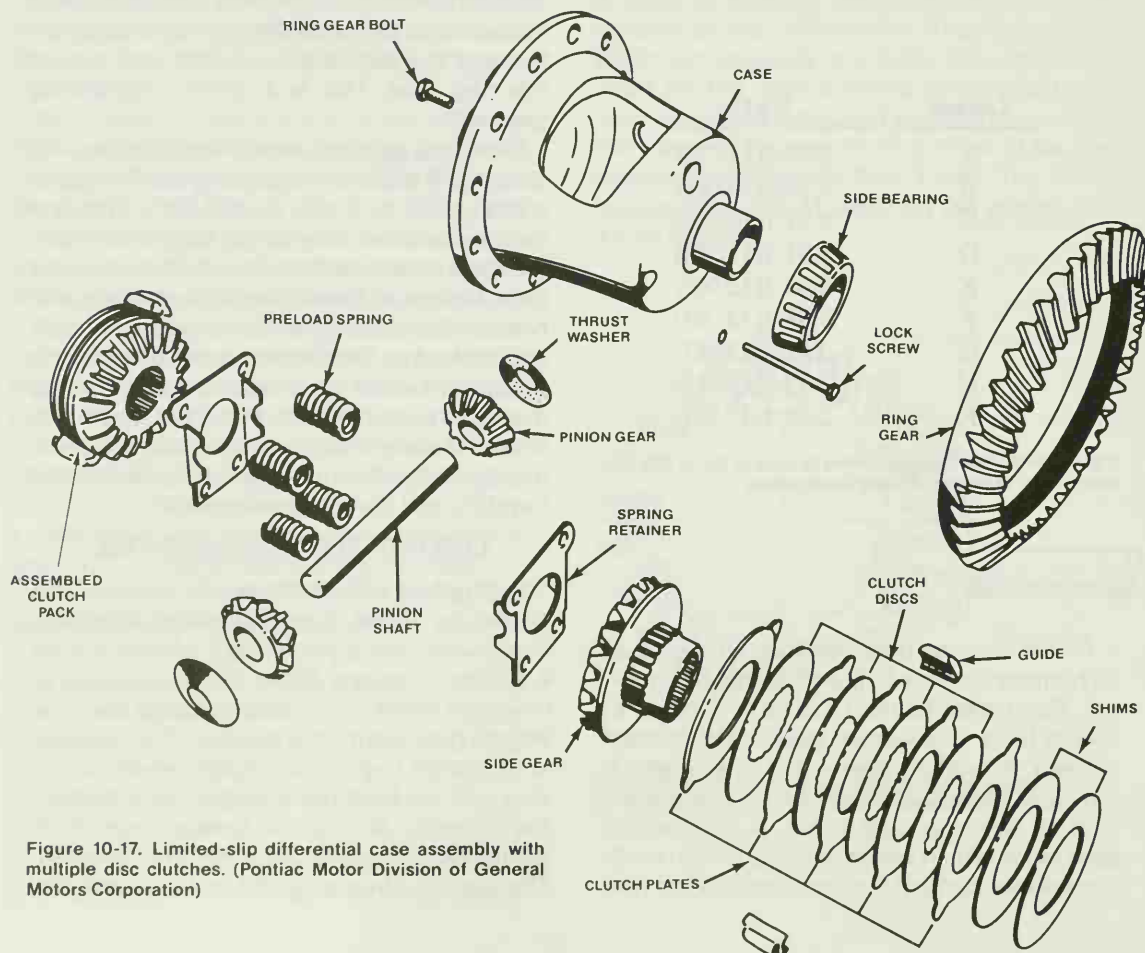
Limited-slip differential case assembly with multiple disc clutches. (Pontiac Motor Division of General Motors Corporation)
